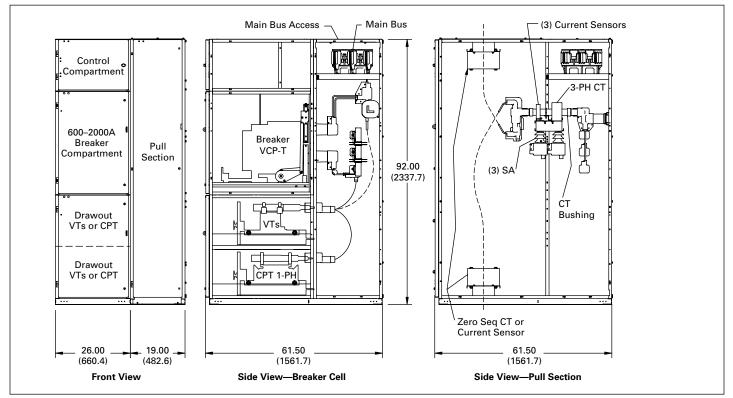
Typical Breaker/Auxiliary Unit and Pull Section, Cables Out Top or Bottom
